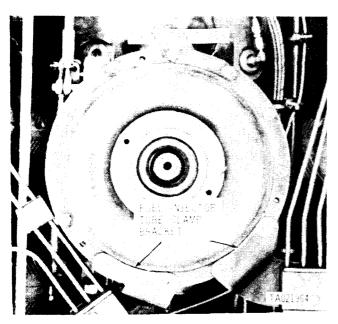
Front fan tower fuel injection tube clamp bracket Iocation.
